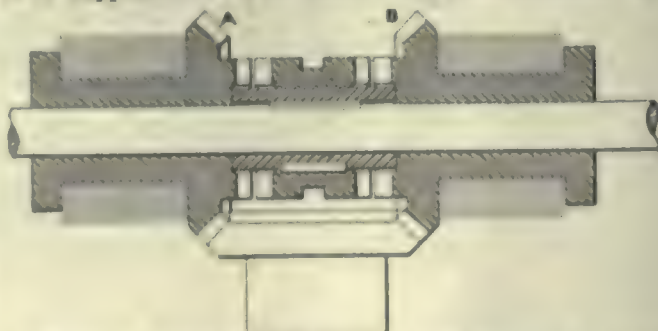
CLUTCH CONSTRUCTION FOR SLIDING SHAFT
